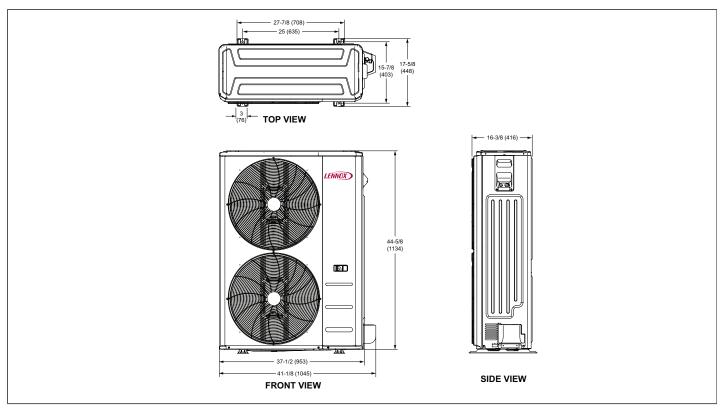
MPC048S4S Outdoor Unit Dimensions - Inches (mm)
